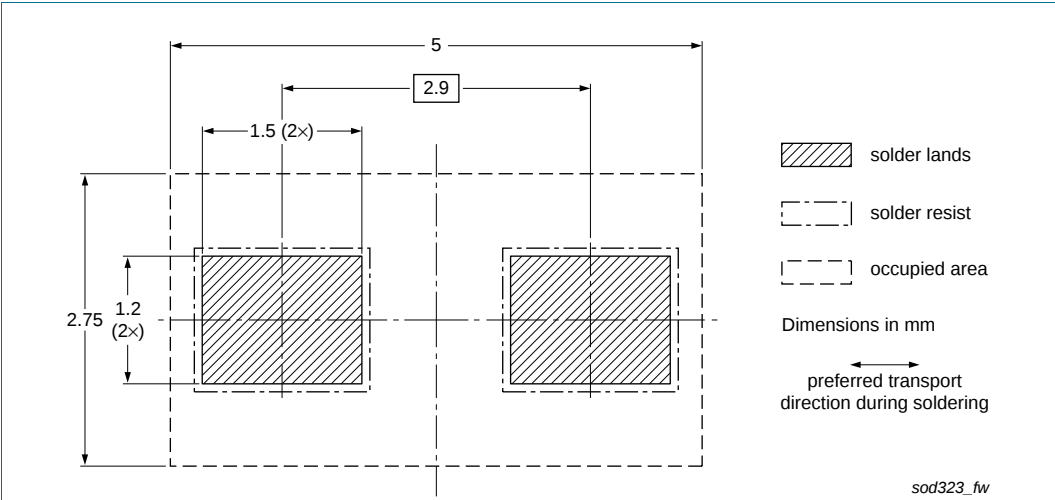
Wave soldering footprint BAS316 (SOD323/SC-76)
